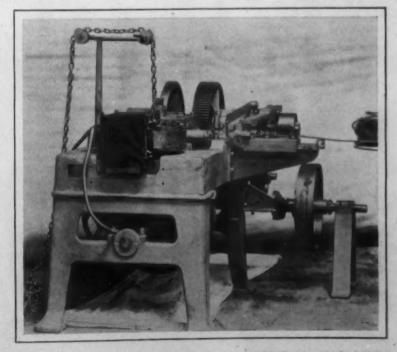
Rear View of Machine in Fig. 1 for Forming and Welding Straight Link Chain
